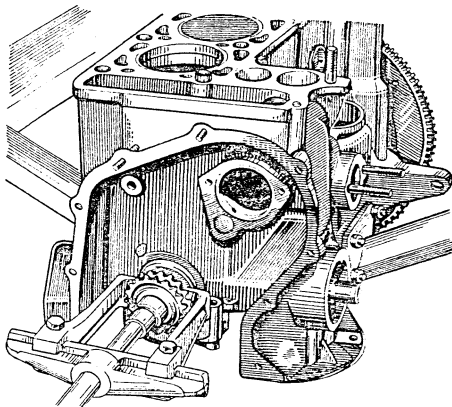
Removing the Crankshaft Sprocket with General-Purpose Remover Tool A.40005/1/7
